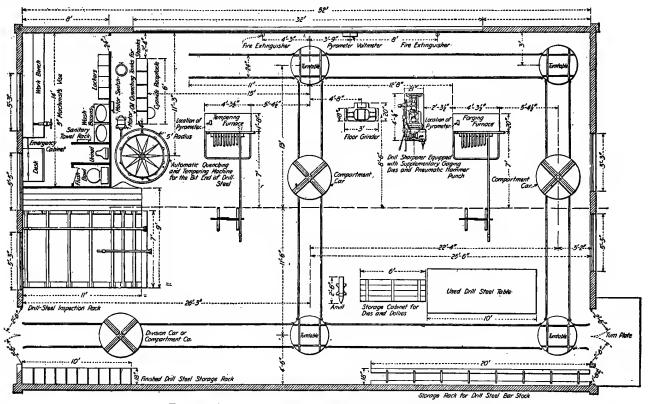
FLOOR PLAN OF IDEAL SHOP FOR SHARPENING STEEL
